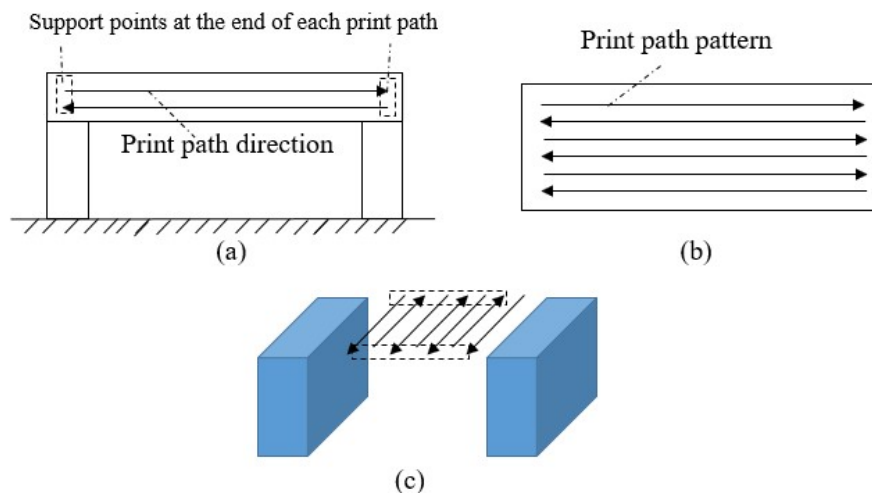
(a) Front view of print path; (b) Top view of print path pattern; (c) No support points beneath the ends of each print path, this is unprintable
